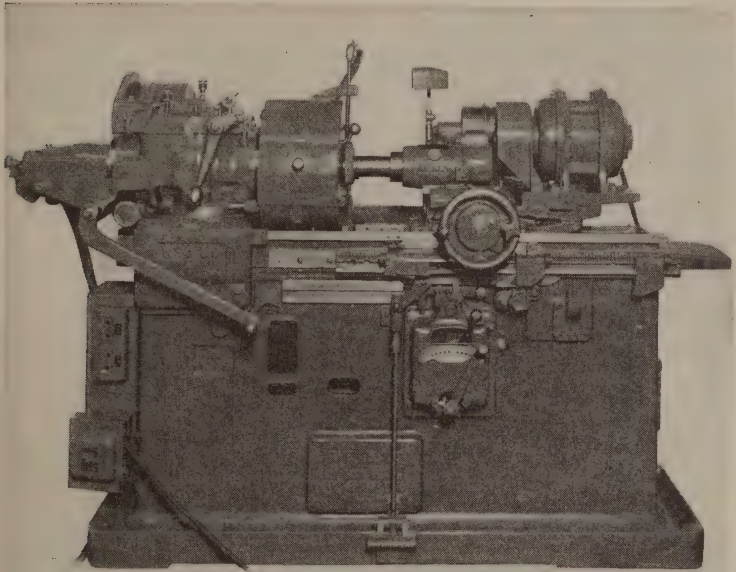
Internal grinding machine. (*Courtesy of The Heald Machine Company.*)
